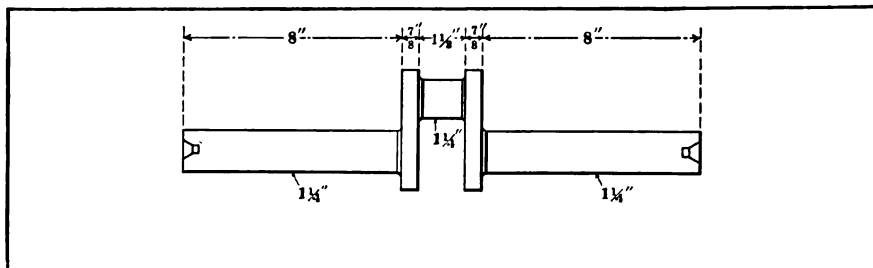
shows a steering gear shaft; .45 carbon steel; 0.035" stock removed; limit 0.001". The machine is a 10" x 24" Special Purpose "Norton" fitted with a 20" x 6 1/2" x 12 1/2" 3824 Comb. Alundum L wheel. The production on this job is 1,000 pieces in 9 1/2 hours.
